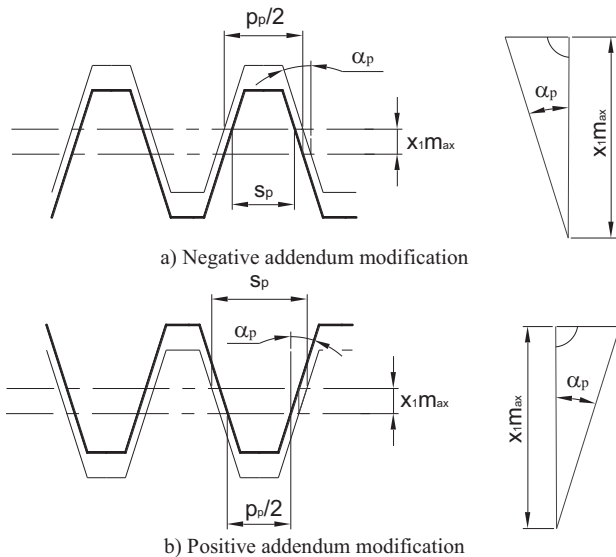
The correlation between the addendum modification and the tooth thickness on the pitch circle on the basic rack gear tooth profile
